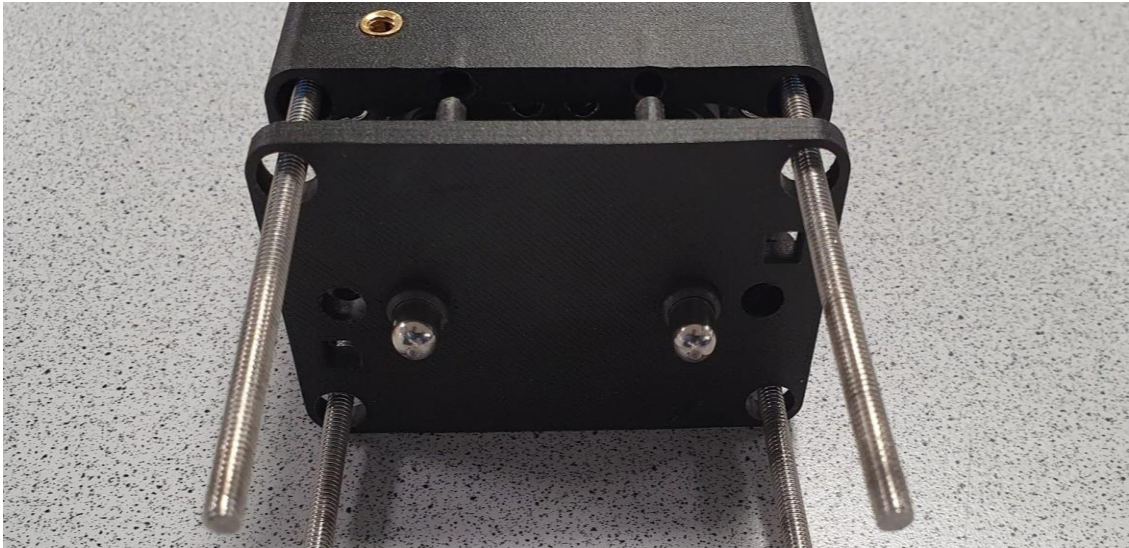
Piston guide plate showing the plain sleeve bearings.
